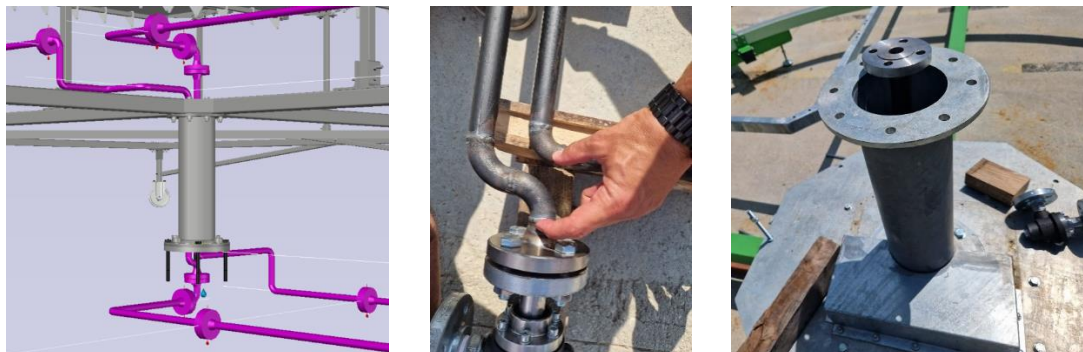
Detail view of the supporting structure design (left) and receiver assembled next to the SunDial (middle and right).
